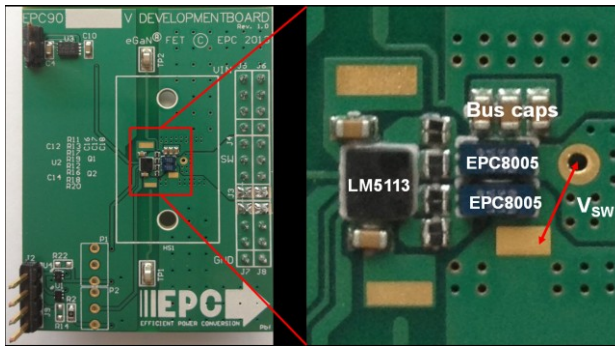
Photo of the evaluation board showing the EPC8005 devices (commercial version of MGN8905) and LM5113 gate driver.
